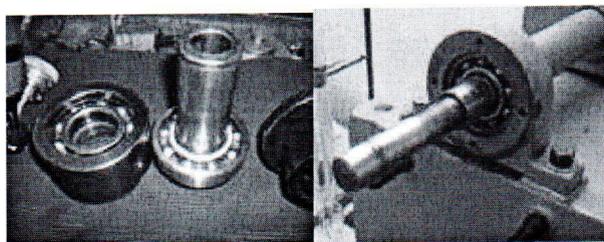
Photograph of the elements of the bearing node having metal-plating copper film formed after friction for 8 min under loading 5650 N and lubricating oil HLP-SV
